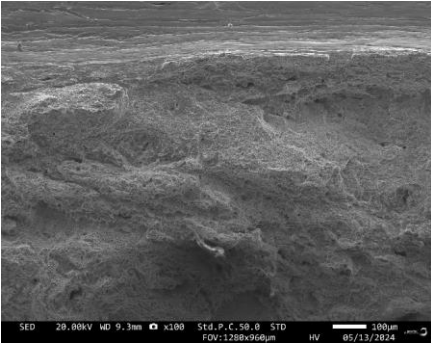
FBB-M2 near fracture surface, ductile, dimple.
